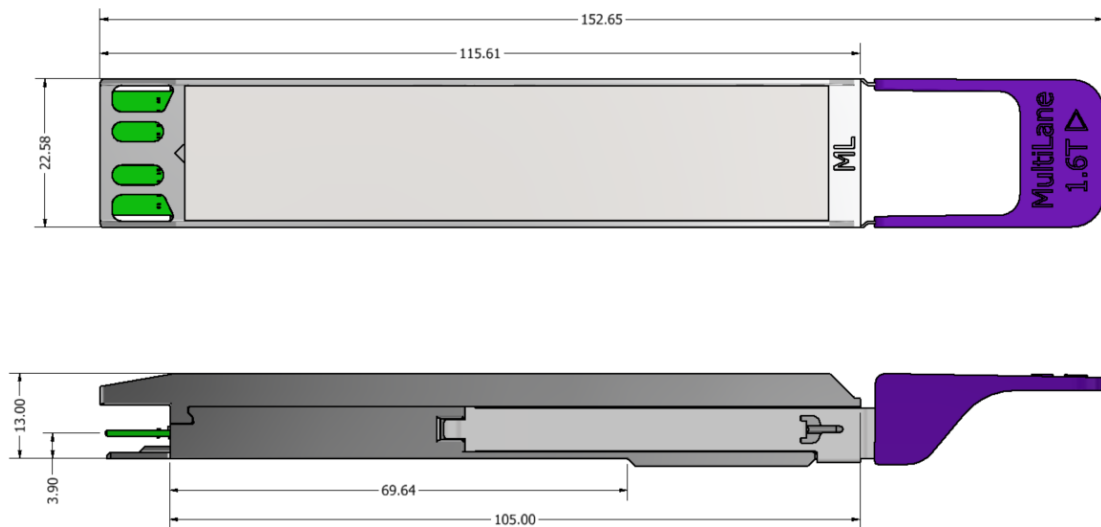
ML4064-AL7I-224 Mechanical Dimensions
